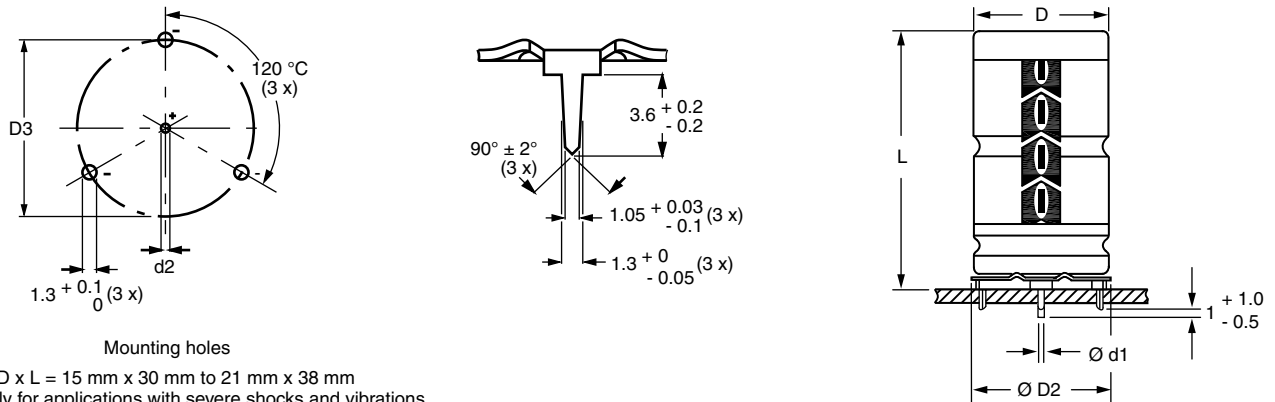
Mounting hole diagram and outline; form MR: With mounting ring and pins
